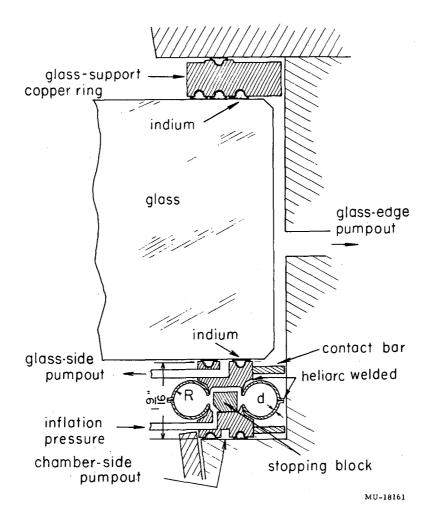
Cross section of the inflatable gasket and related parts of the chamber rim and glass, as installed.
